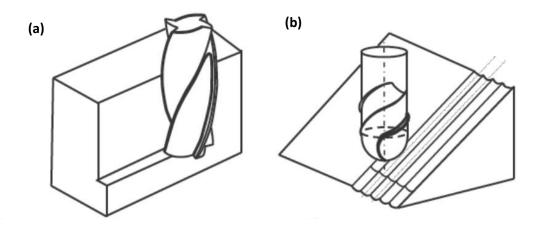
Milling types (a) peripheral (or flank) milling (b) ball-end milling (Source: [21])
